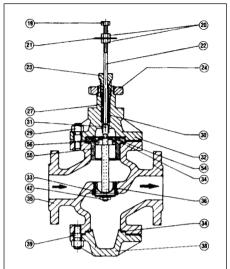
Model 7R single seated valve body reverse acting with "balanced" plug
